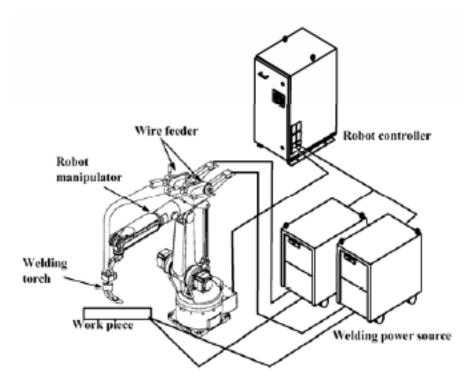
Tandem MAG welding equipment (Ueyama et al., 2005, p. 3.)
